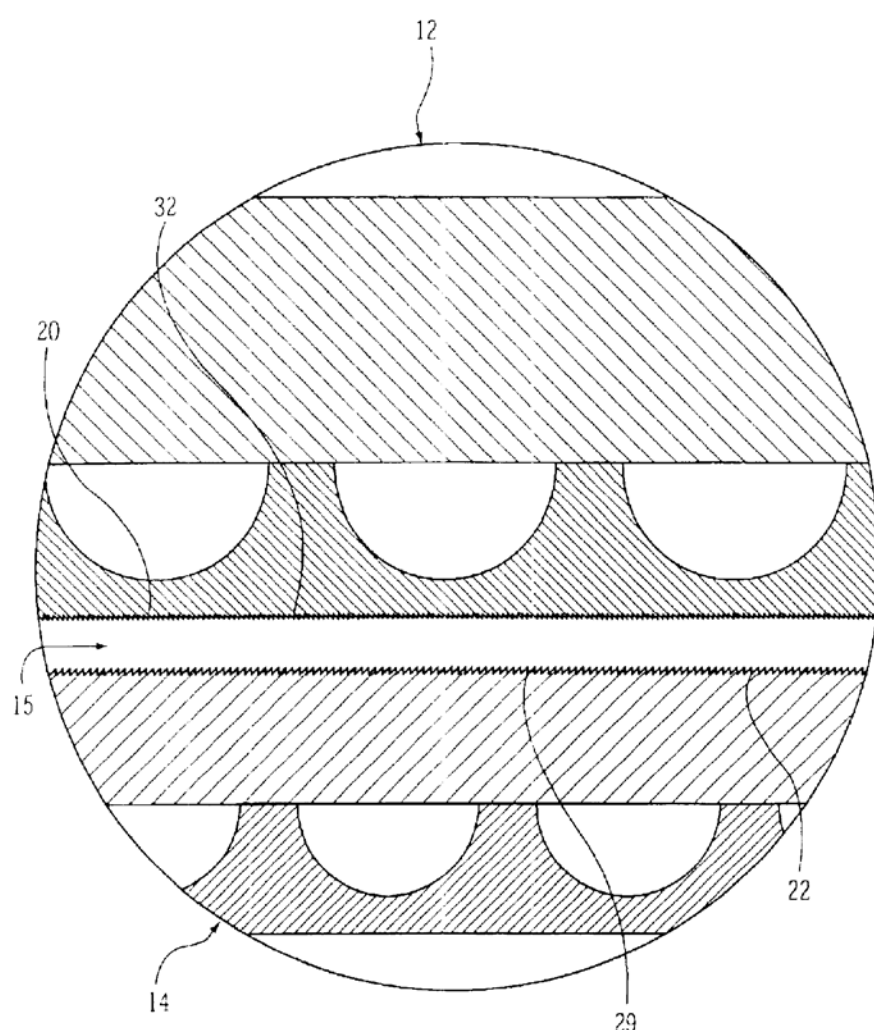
Cross-sectional view of the outer and inner electrode assemblies (12, 14) and the inter-electrode gap (15). Upon each electrode surface (20, 22) there is a saw tooth shaped pattern which is formed by threading [76].
